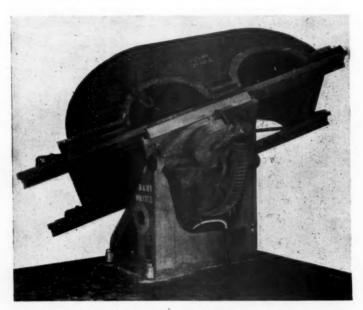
Welding positioner manufacturered by Messrs. Davy & United Engineering Co. Ltd., Sheffield.
